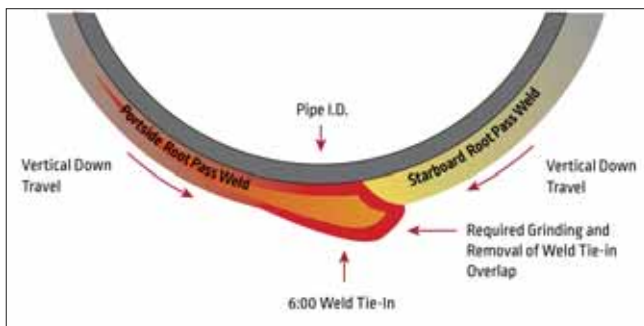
Typical port side tie-in weld at 6 o'clock overlapping the previously ground starboard side weld. In all, four manual grinding processes for each single 360° weld pass.
